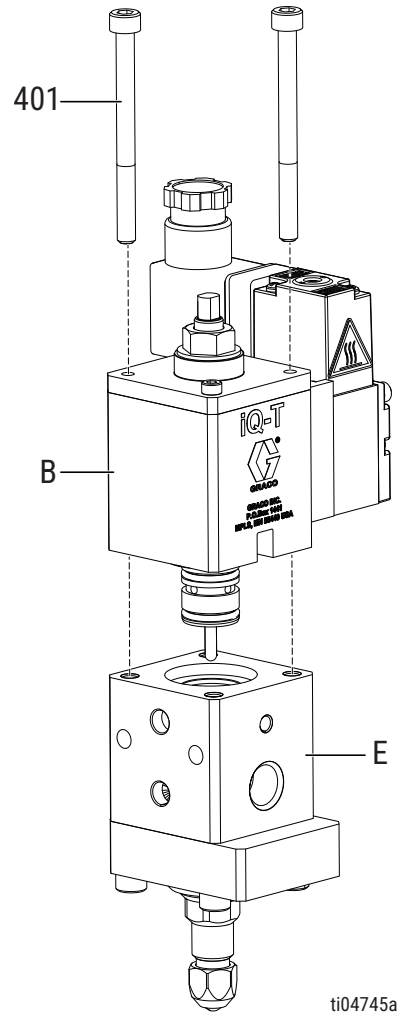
Ball Seat and Tip Seal Air Section Removal
